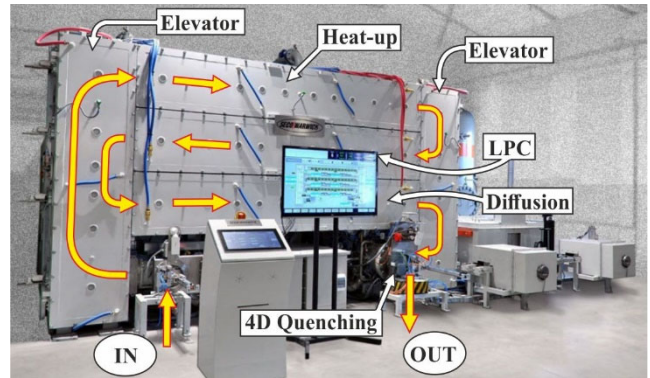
A SECO/WARWICK UCM furnace for low-pressure carburising – a general view
